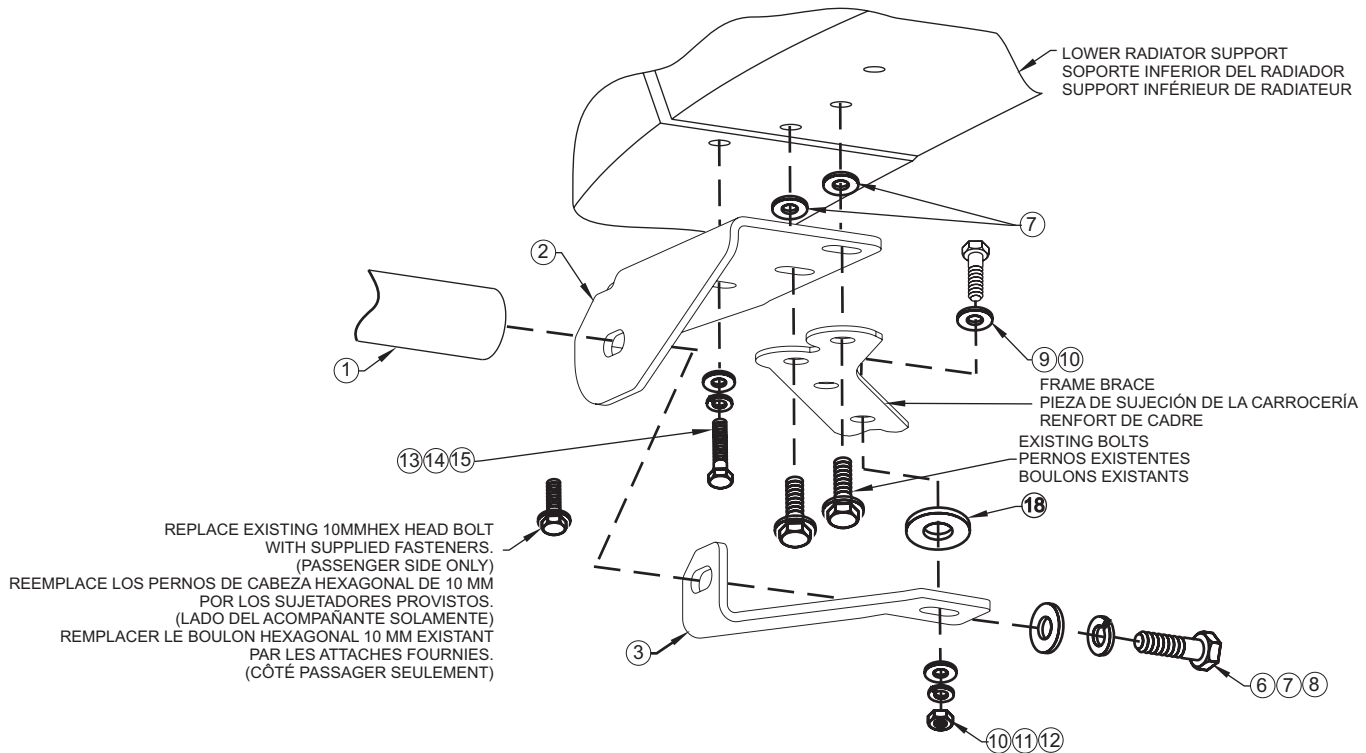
INSTALLATION VIEW OF PASSENGER SIDE, DRIVER SIDE OPPOSITE
